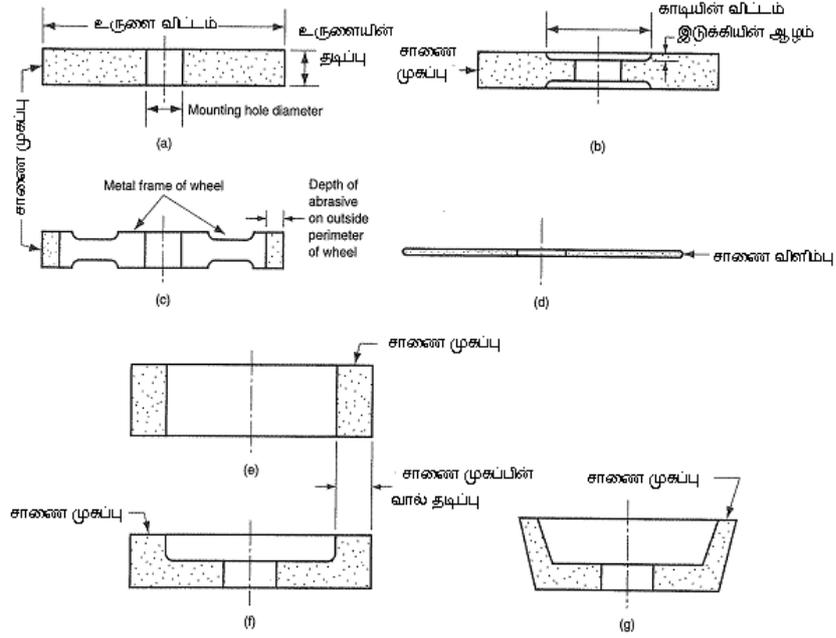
Grinding wheel shapes (a) Straight (b) Recessed two sides (c) metal frame wheel with abrasive bonded over the circumference (d) Abrasive cut off wheel (e) Ring (f) Cup (g) flaring cup
